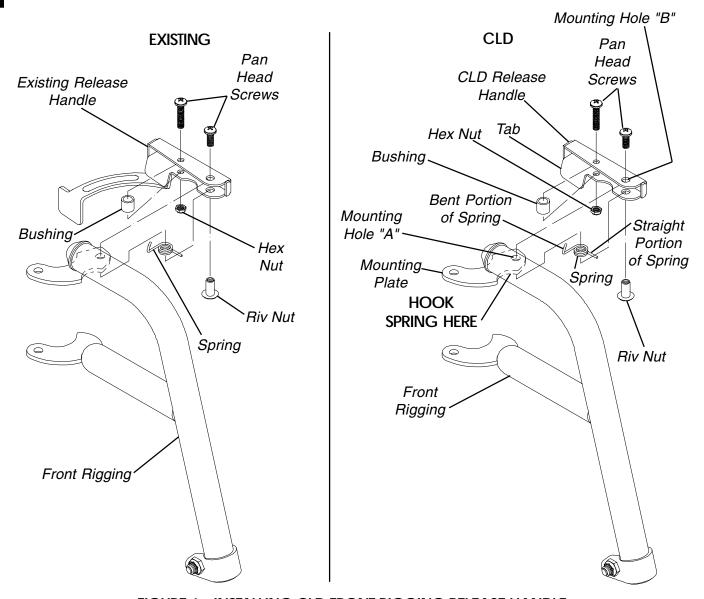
INSTALLING CLD FRONT RIGGING RELEASE HANDLE
